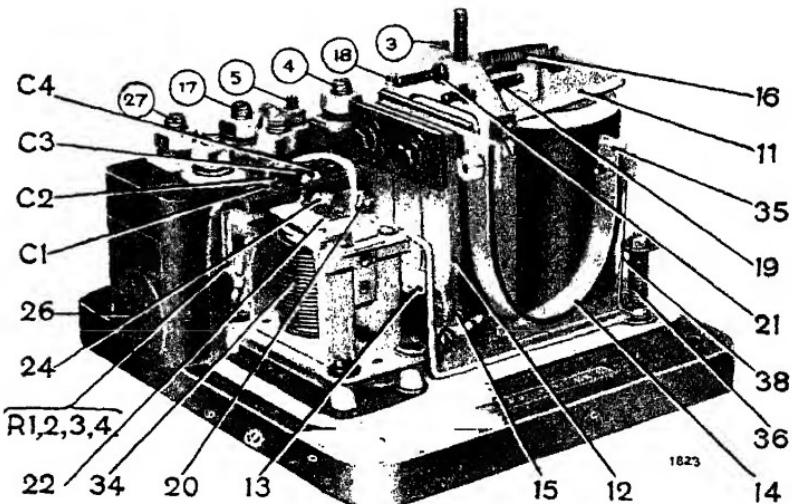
SCINTILLA C.V.C. REGULATOR AND CUT-OUT
